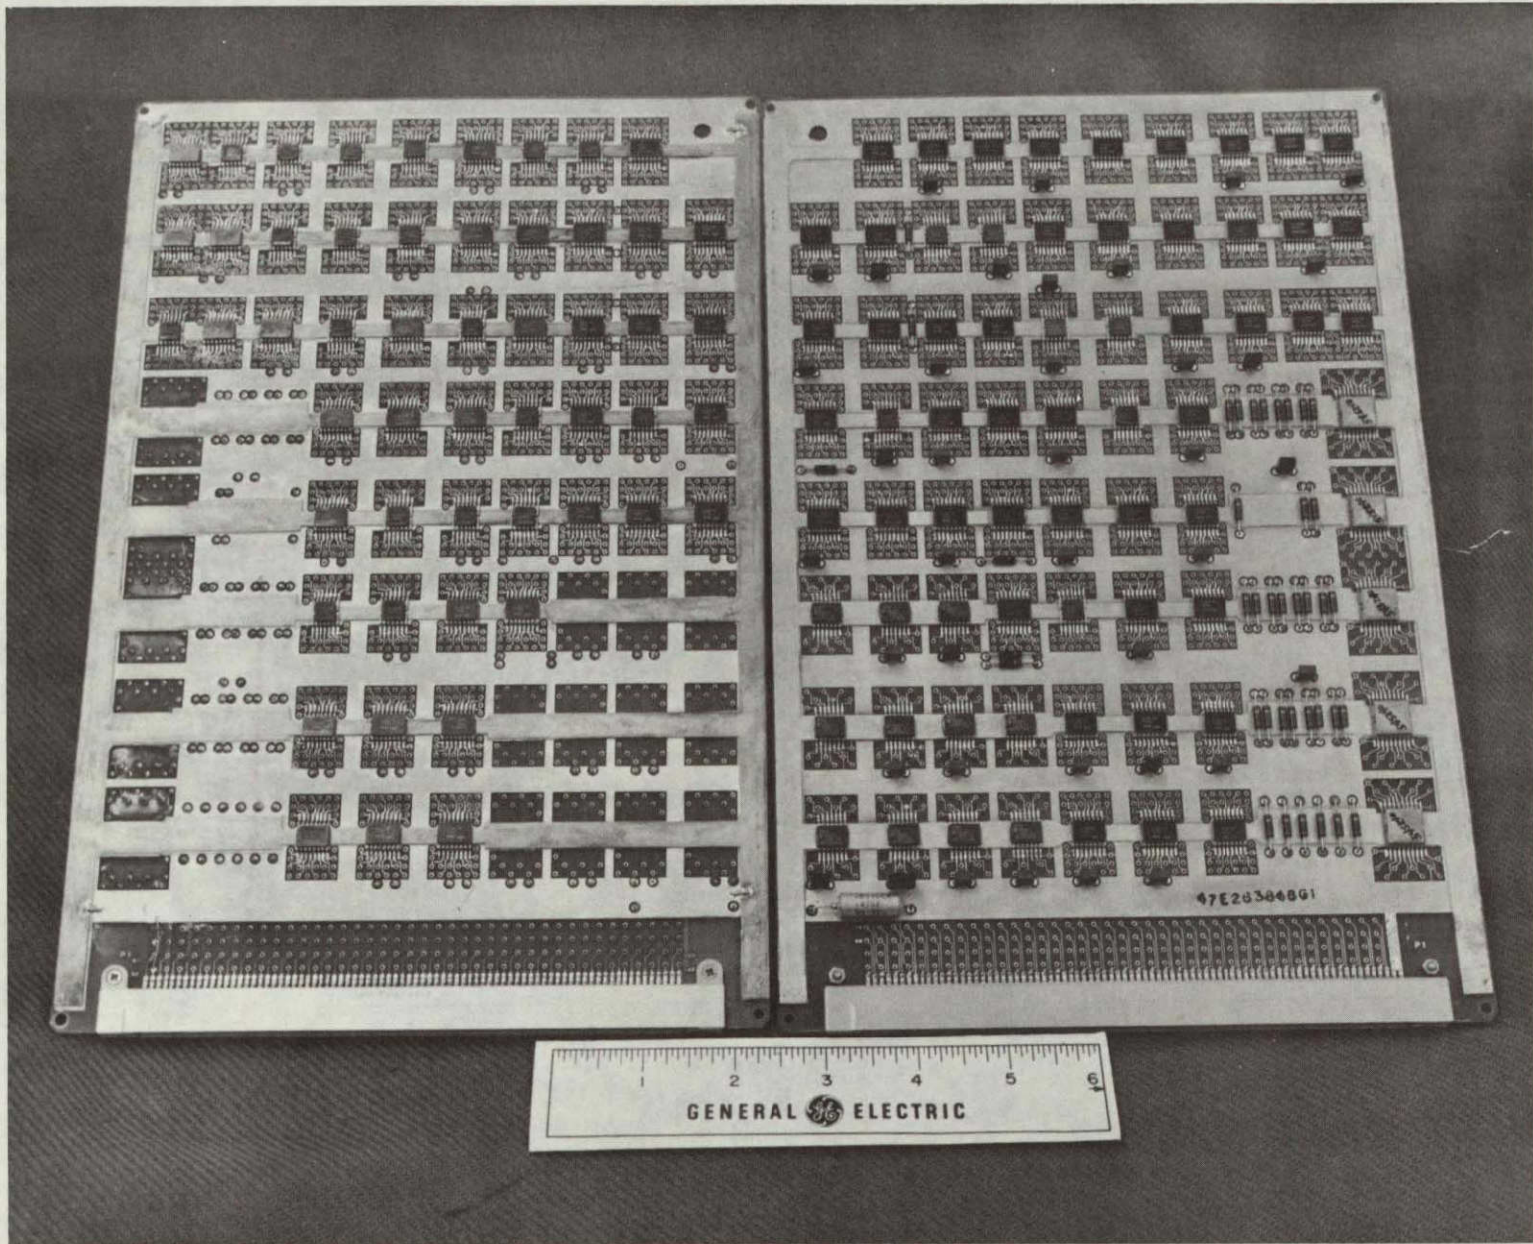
POC Control Logic Printed Wiring Assemblies
